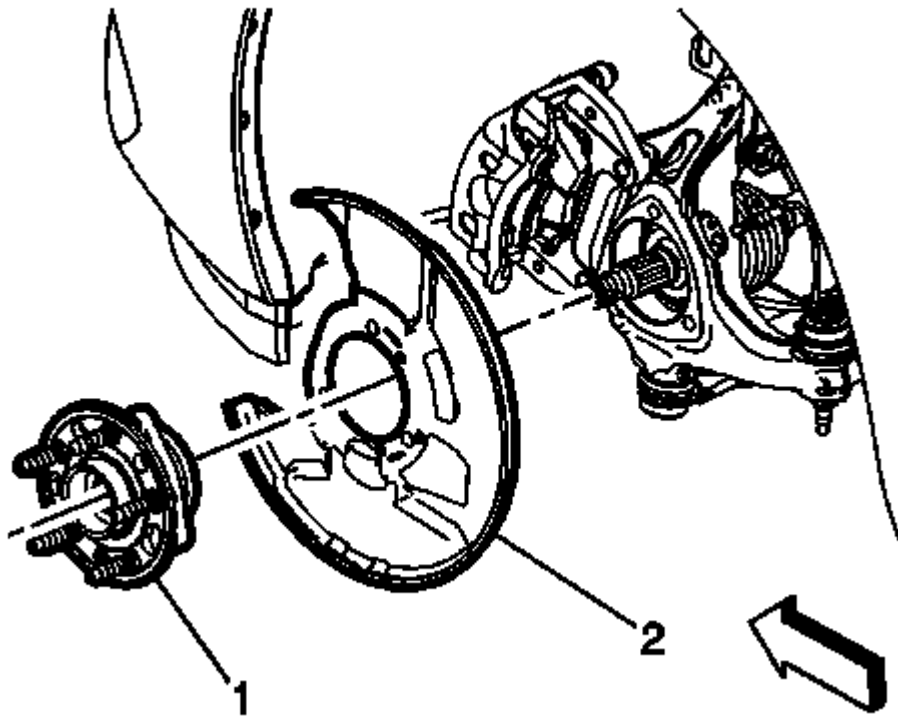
Front Wheel Bearing And Hub Assembly And Front Brake Shield
